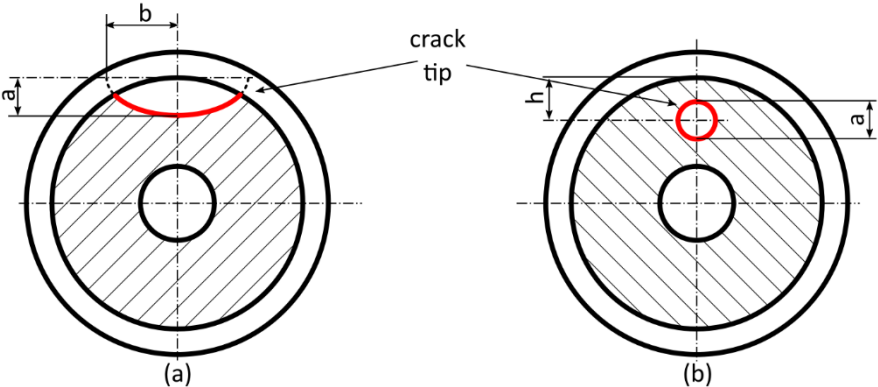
Schematic geometry of the surface (a) and the internal (b) cracks
